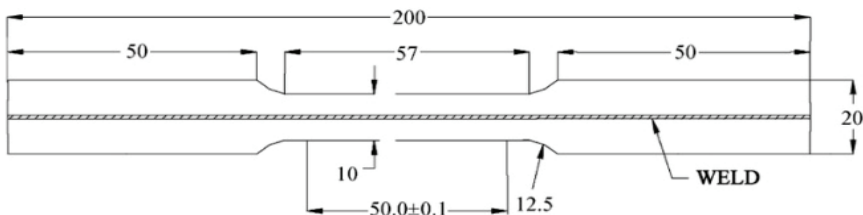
Dimensional parameters of test specimens according to ASTM E8 [8]
